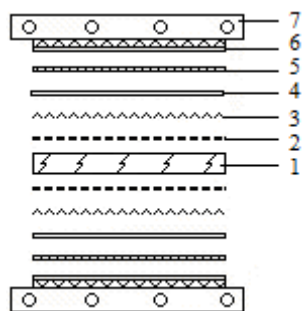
Putting the package between the platens of the press: Chipboard plated on both sides with aluminum foil: 1-chipboard; 2-barrier film; 3-adhesive film; 4-aluminum foil; 5-bright finished sheets; 6-compensation cushions and protection plate; 7-platens.
